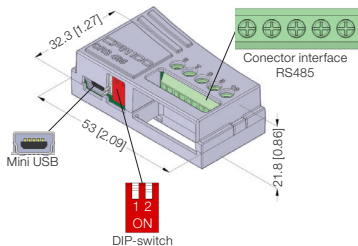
CFW100-CRS485 dimensions in mm [in] and connectors location
